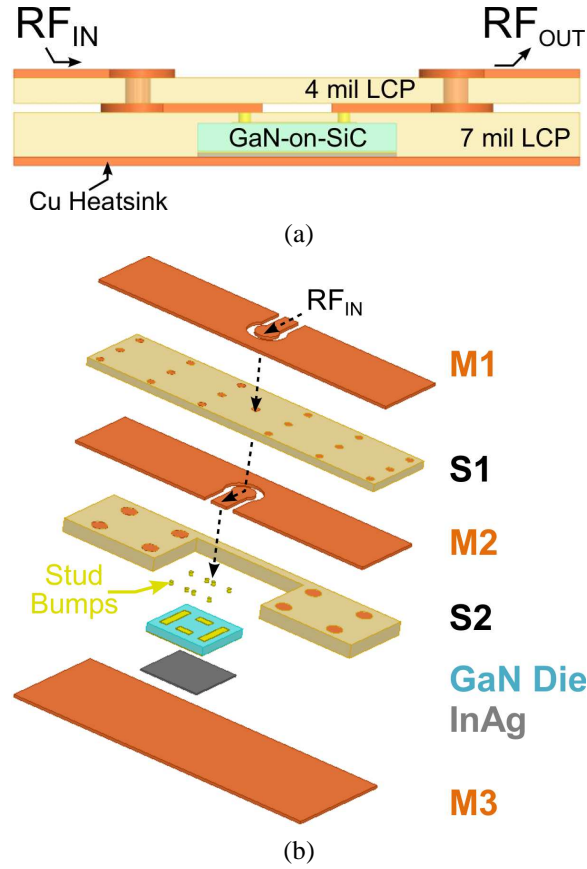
(a) Cross-section of the encapsulated package in organics for GaN devices and circuits, (b) exploded view of the package.
